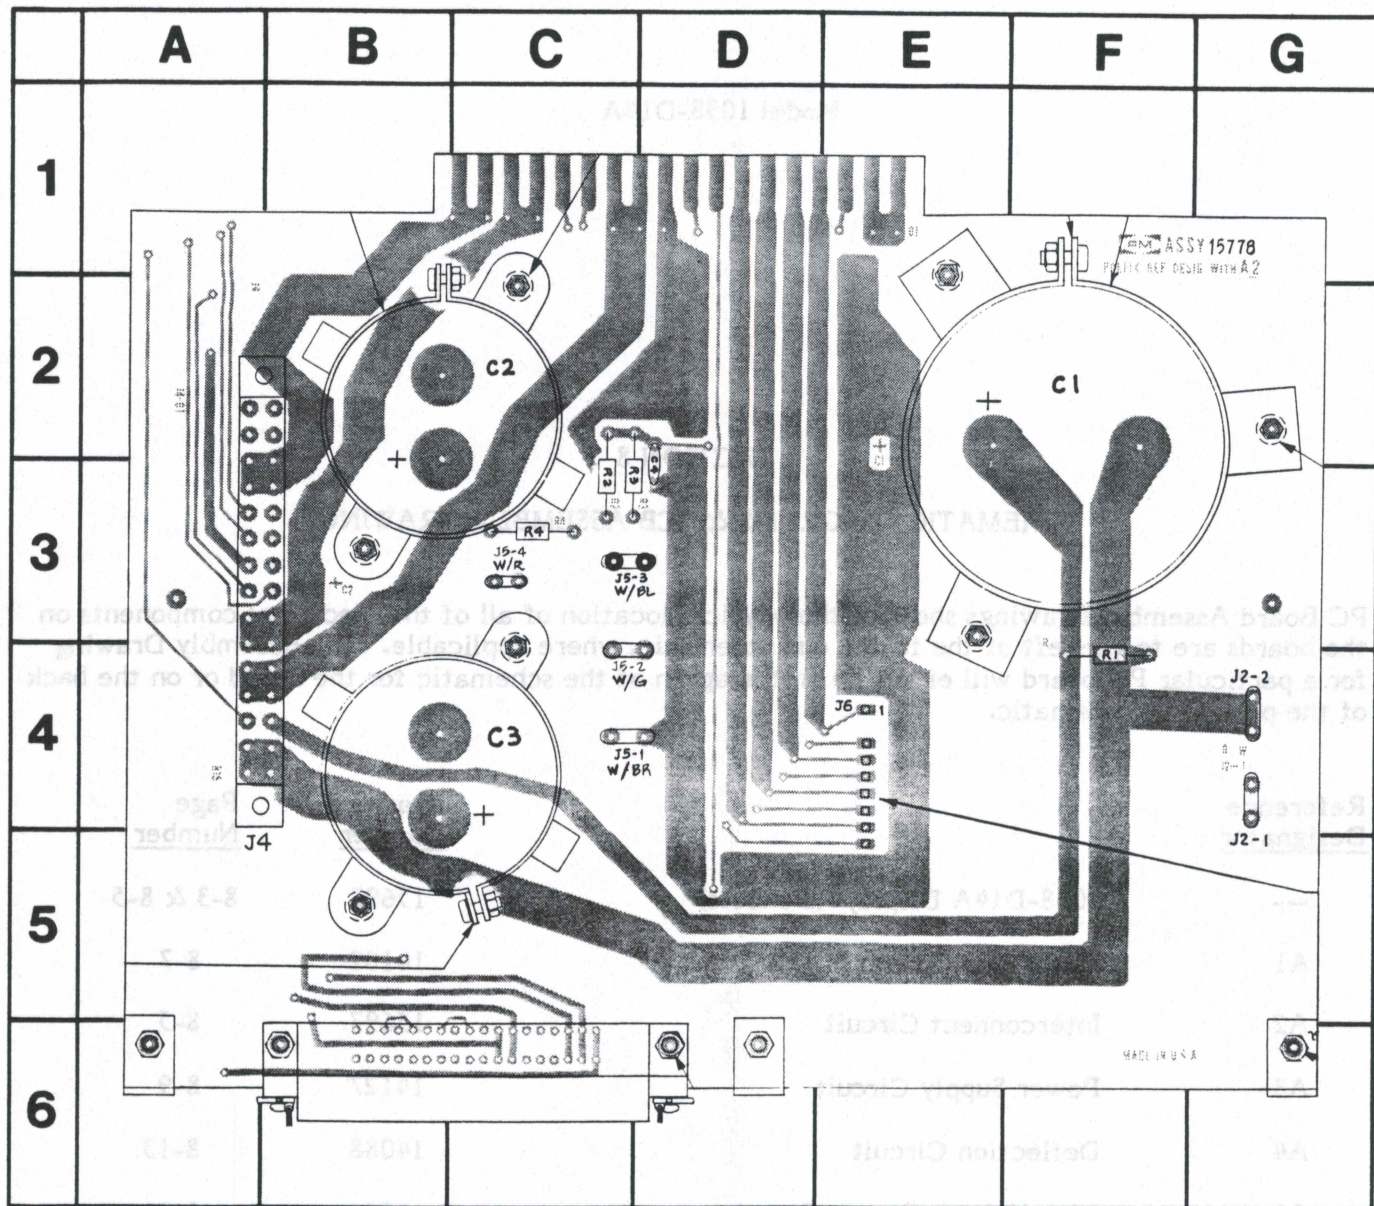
INTERCONNECT PCB ASSEMBLY
